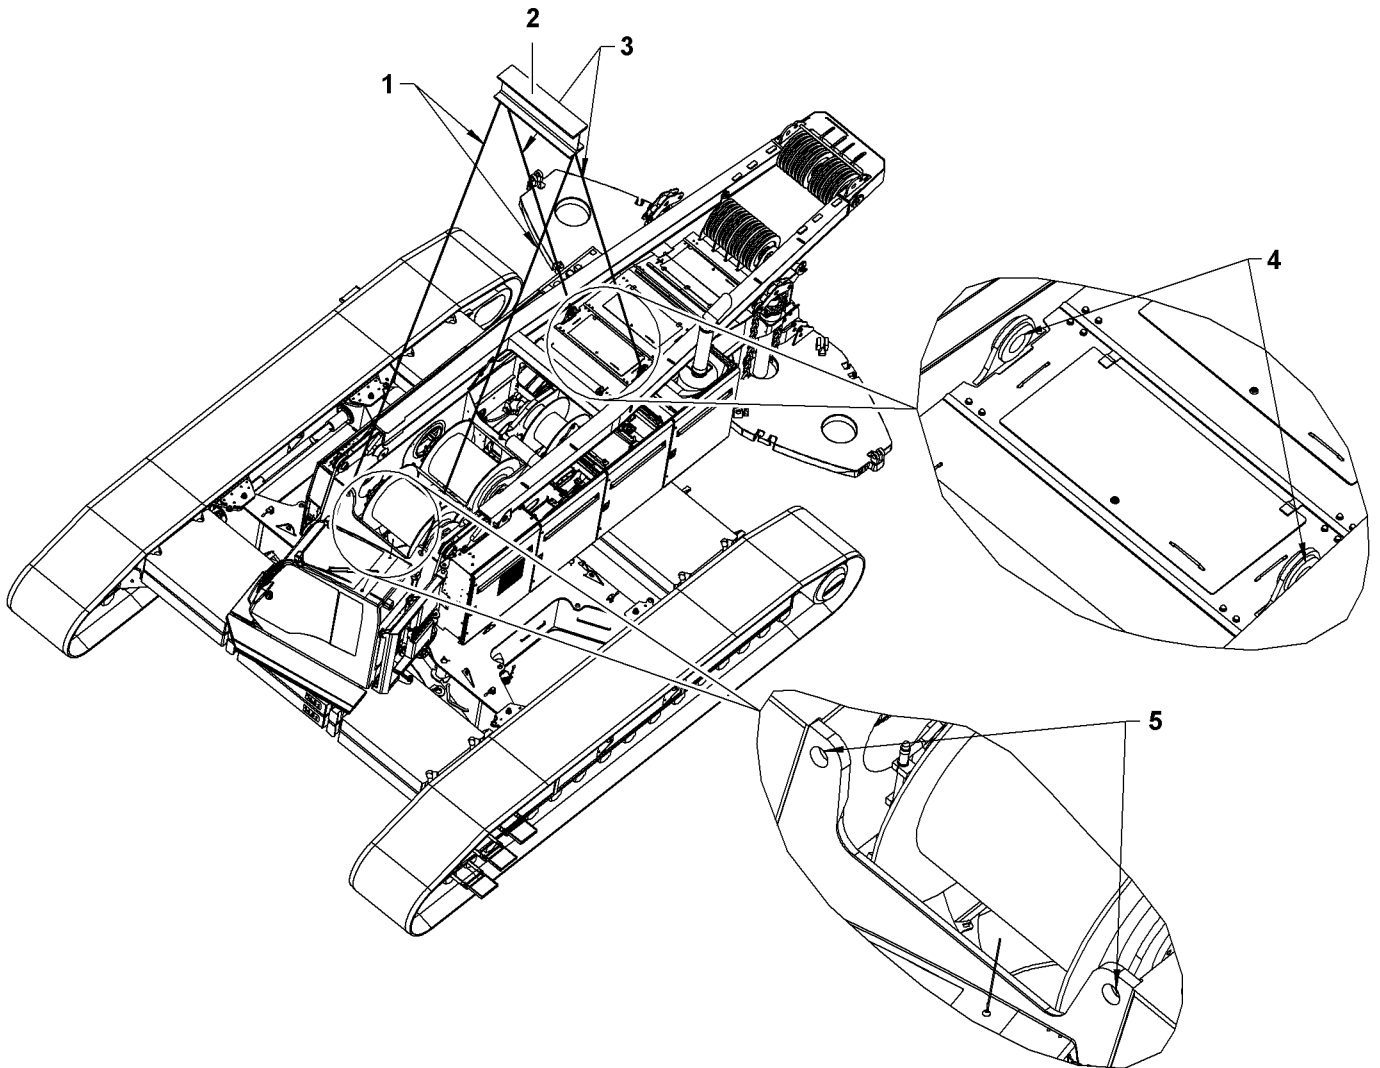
Loading the basic machine with crawler side frame, carbody counterweight and rear counterweight - lifting points
